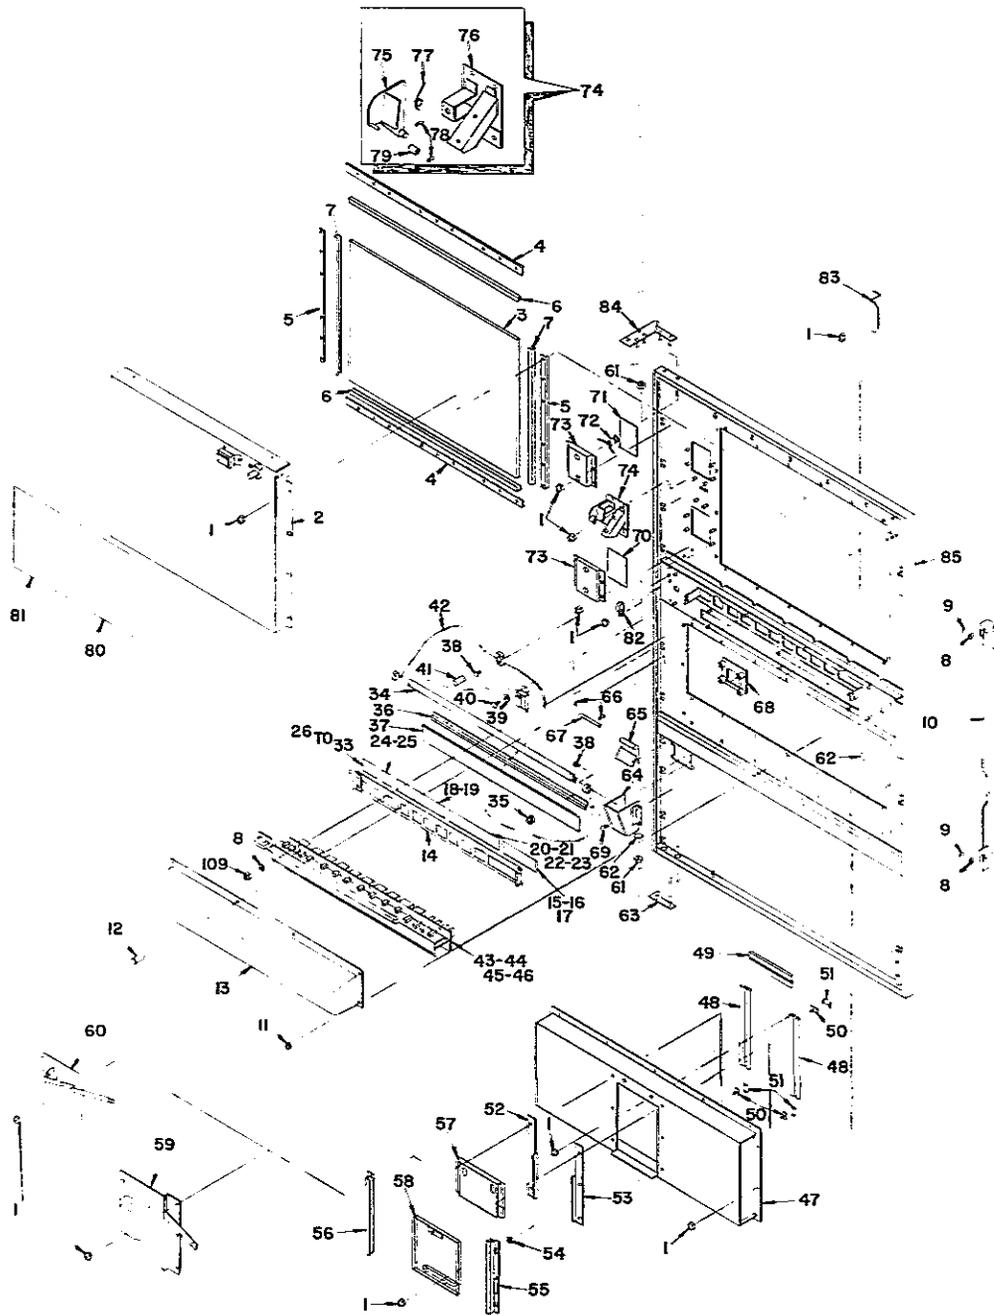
A — DOOR ASSEMBLY — ROWE AWARD
